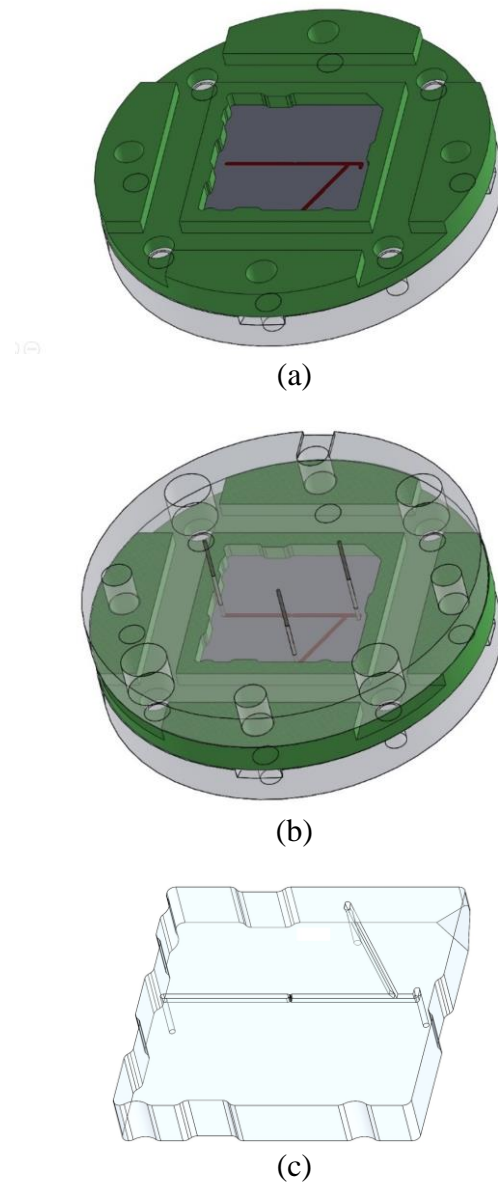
Laser Lysis Chip Molding by Using One-step Molding Process. (a) Chip assembling to PDMS mold. (b) Alignment lid for inlet and outlet channels. (c) Chip bonding with cover glass. (Not to scale)
